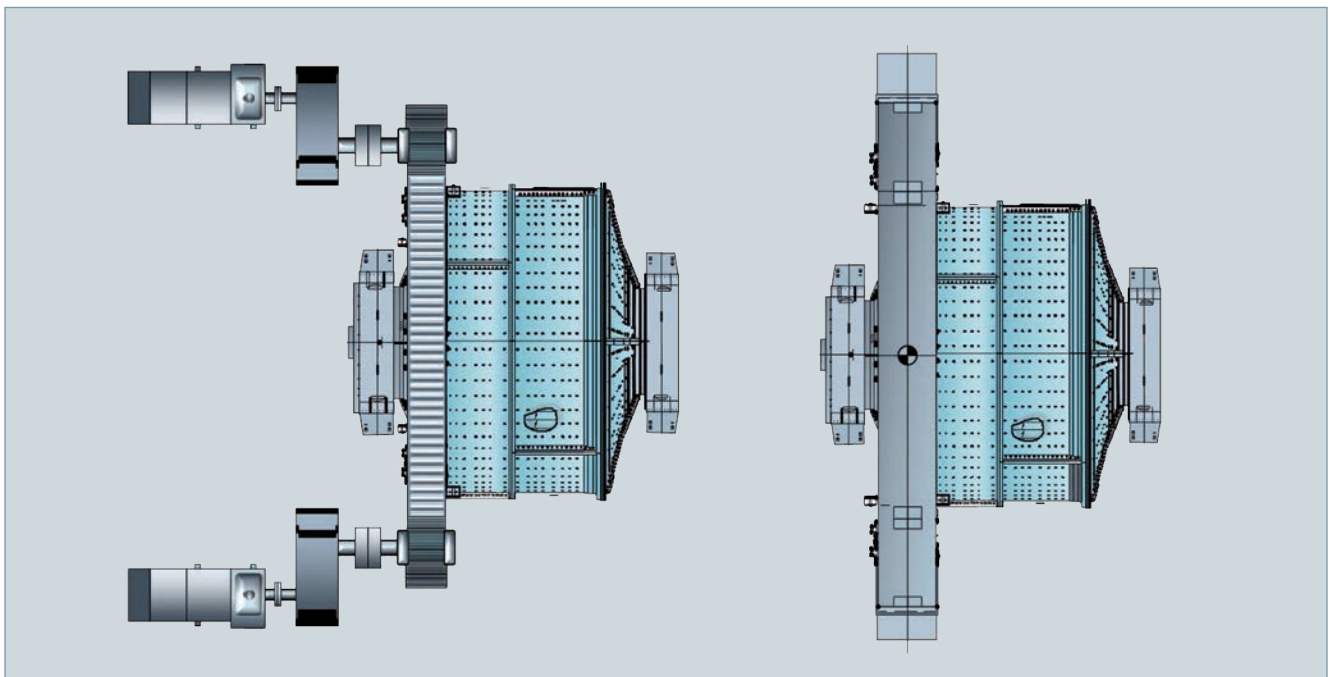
Top view of SAG mills with alternative drive options; left side: dual pinion drive including motor, gearbox, pinion and girth gear; right side: gearless ring motor
